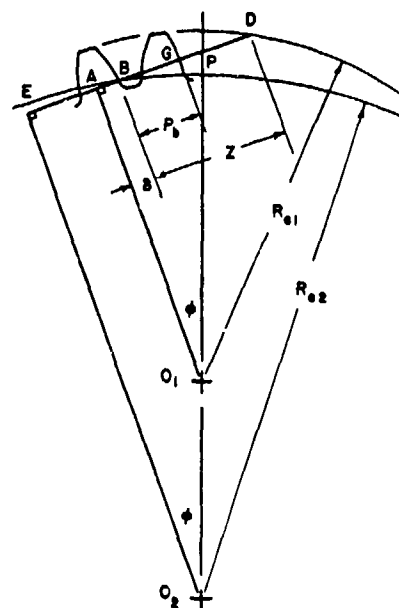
Highest point of single tooth contact for an internal gear mesh.
